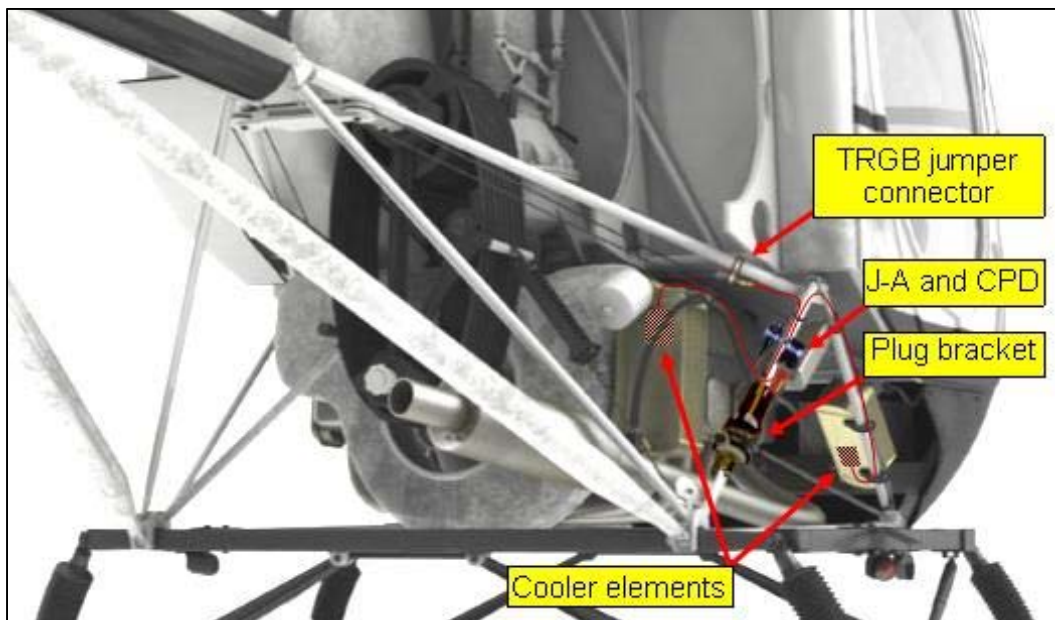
Example of suggested locations for shore power plug (mounted with TU01062 bracket assembly), junction J-A, CPD and tail rotor jumper cable connector, hard mounted in accessible location.
